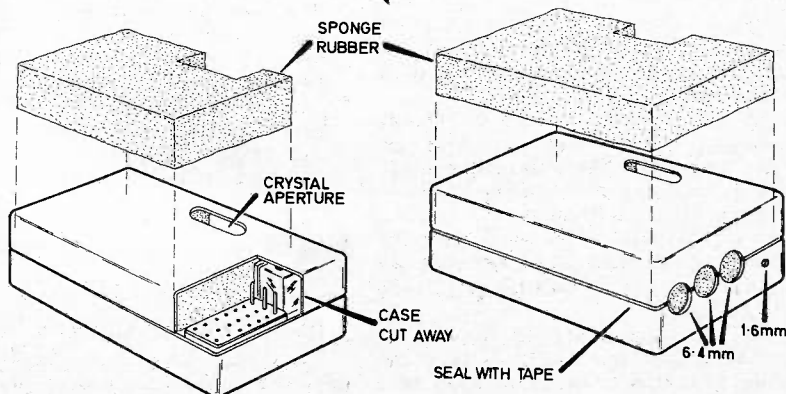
Receiver case showing cut-outs required and sponge rubber pad.
